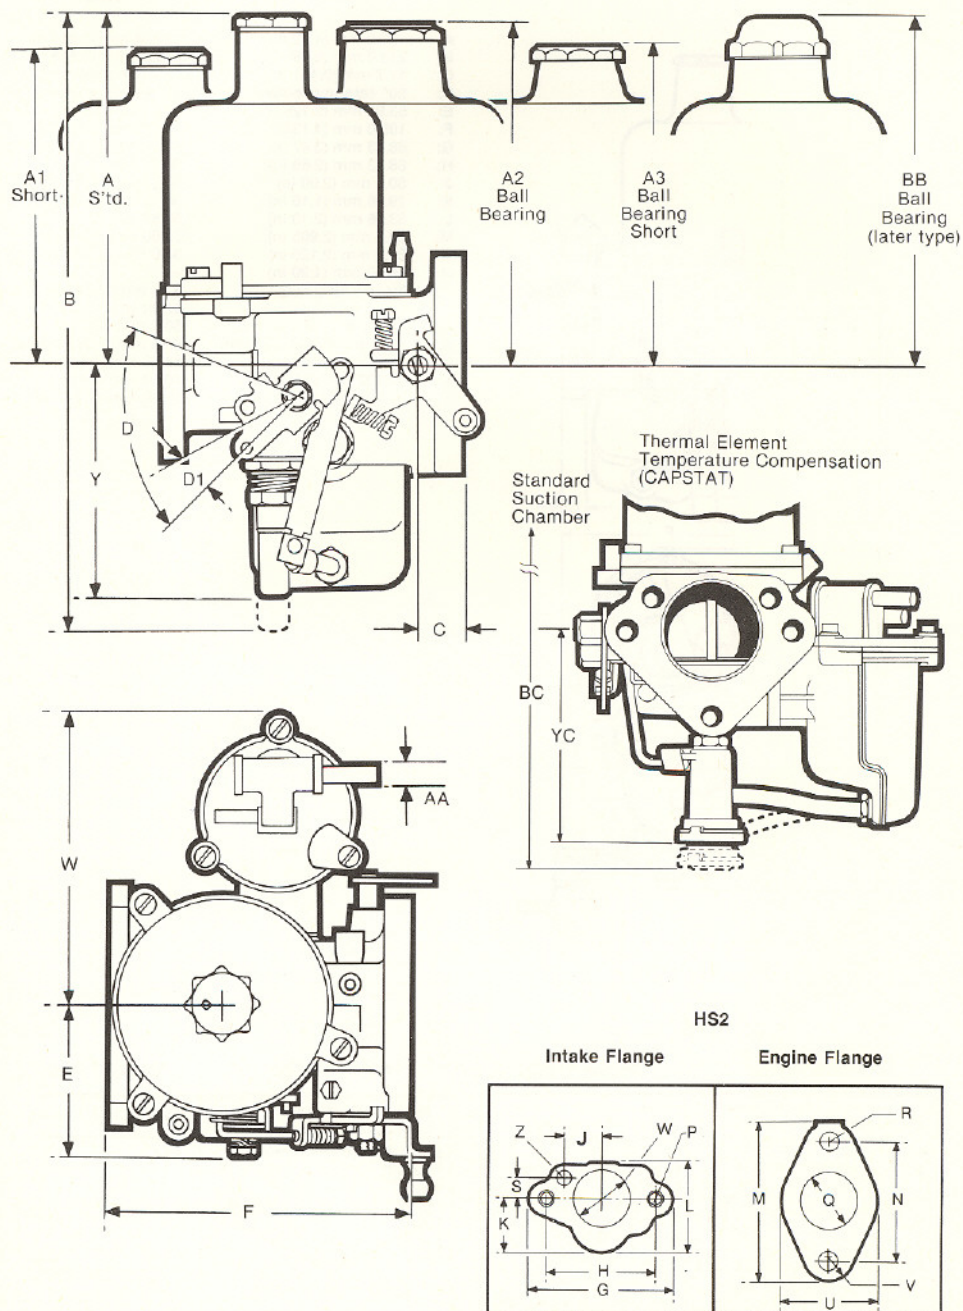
(a). Dimensions HS2 – HS4 – HS6 Carburettors
